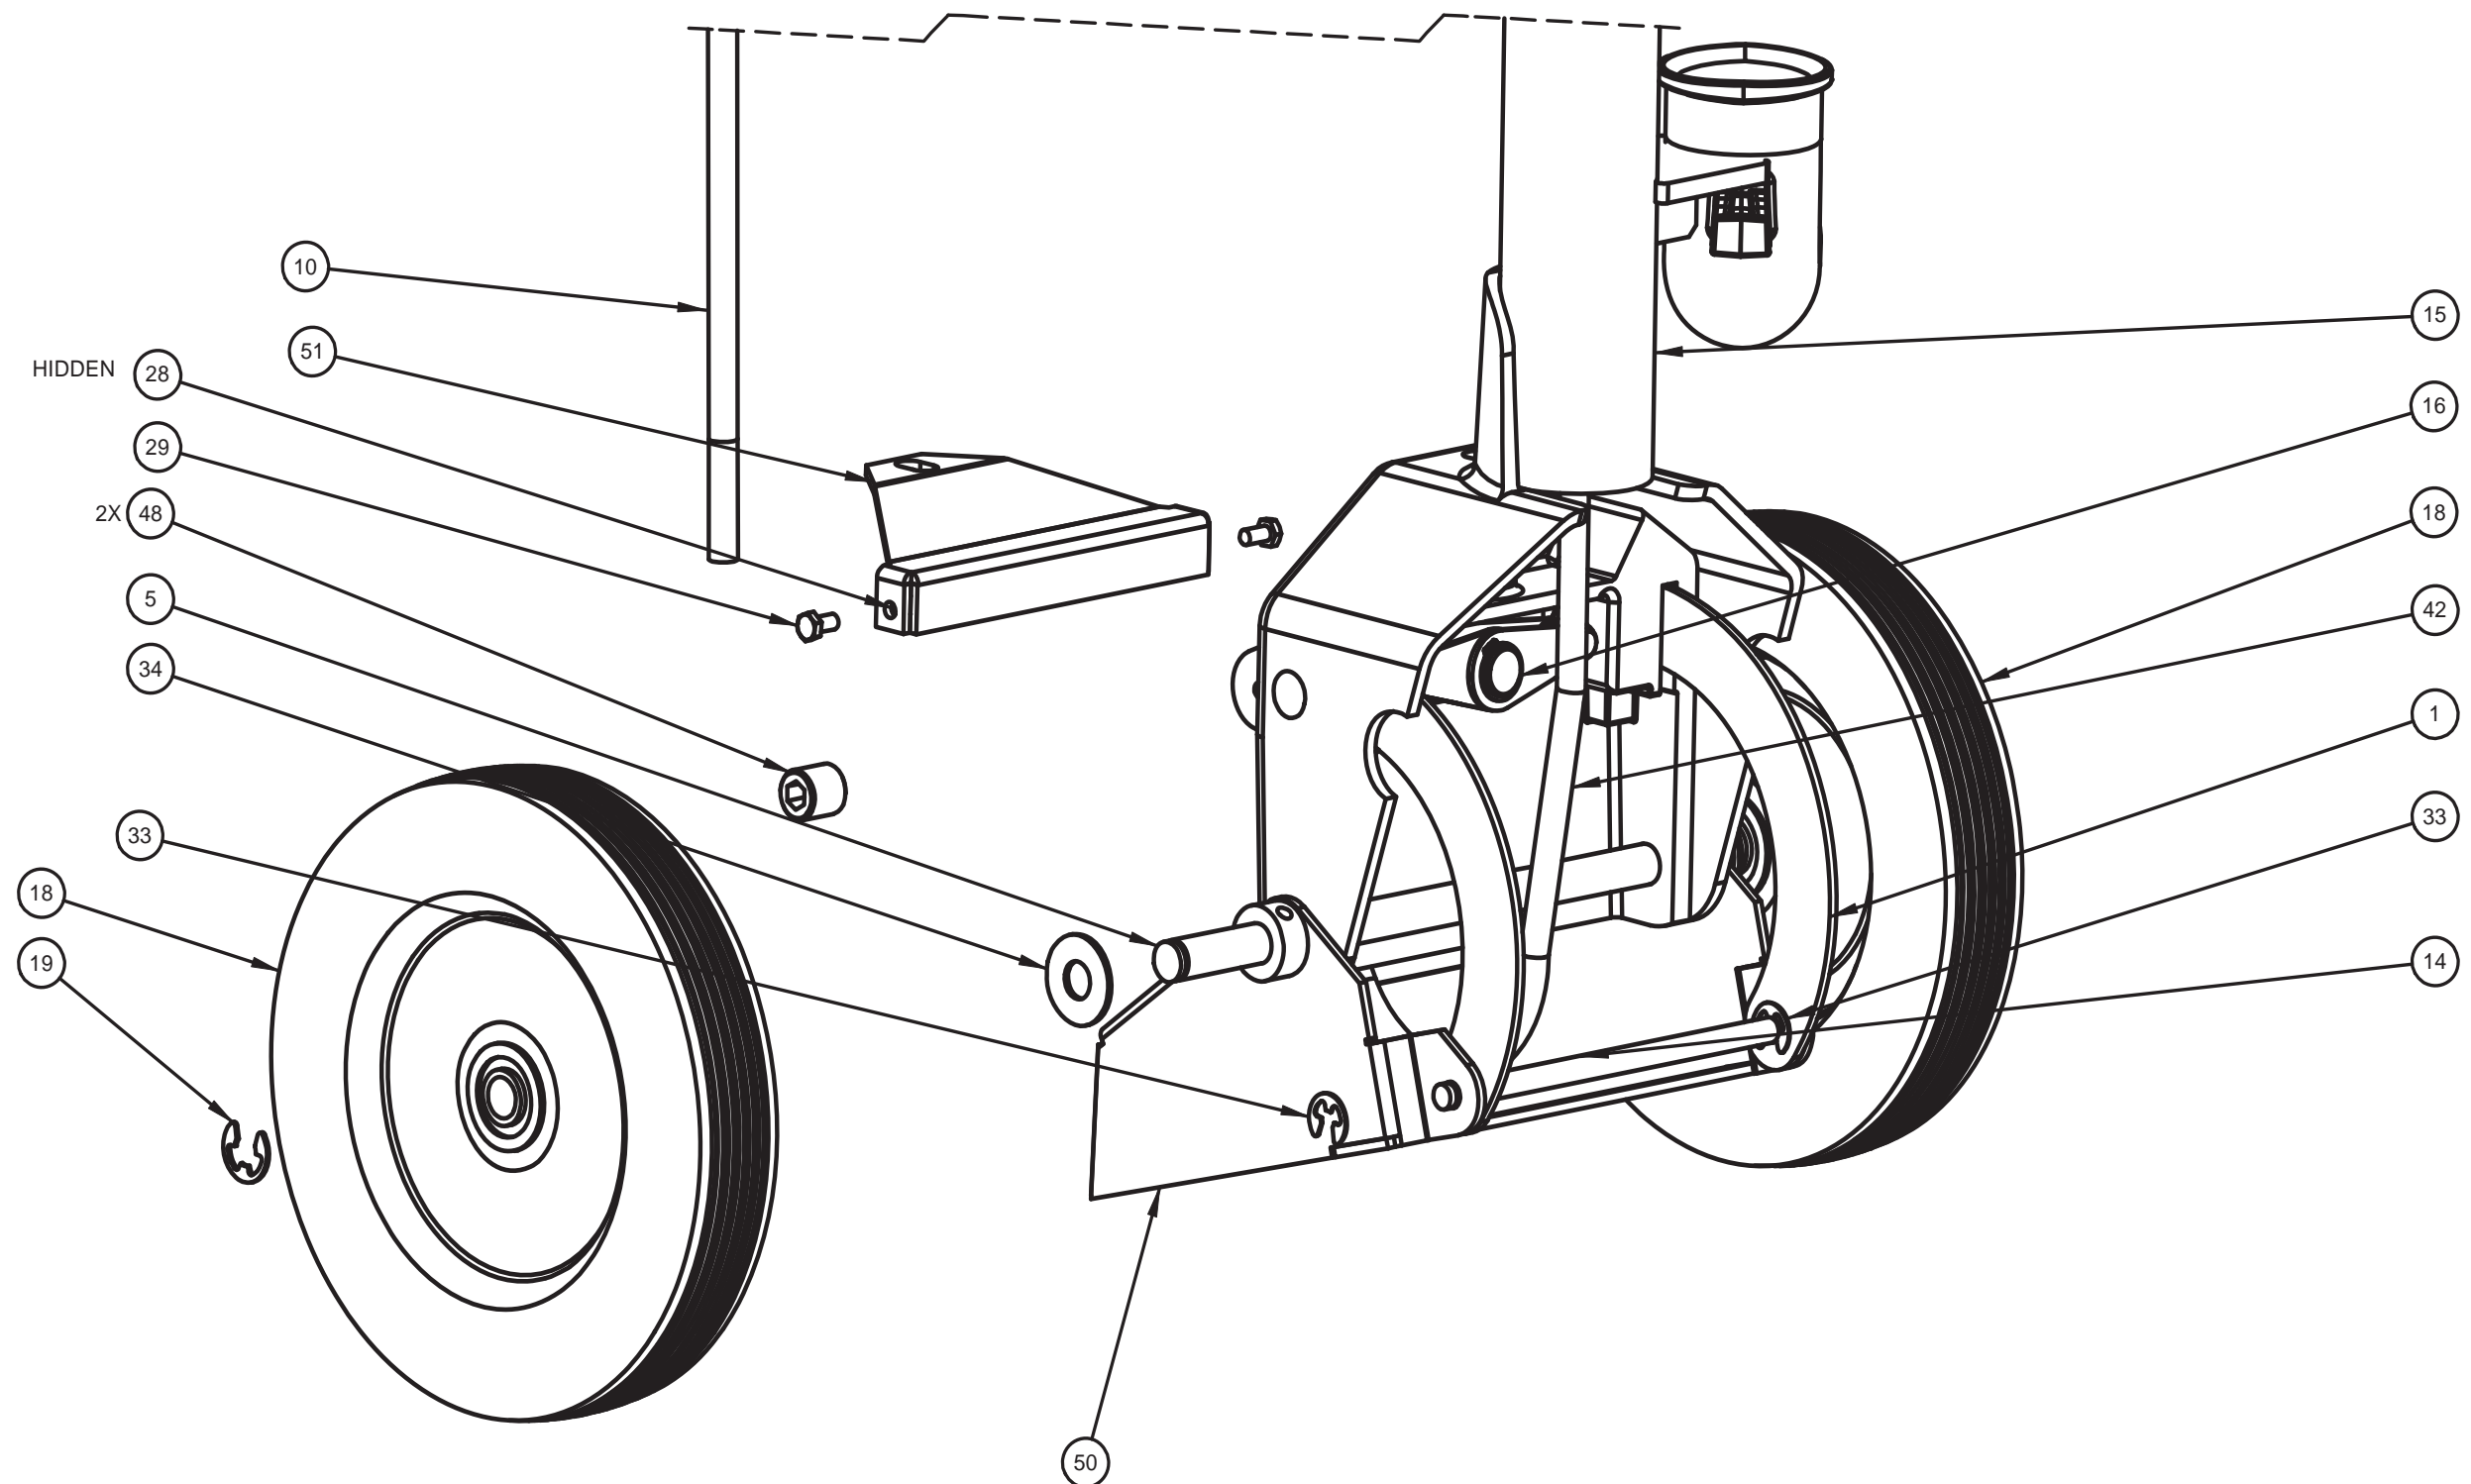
Upper and Lower Handle Assembly - View 2 of 3
